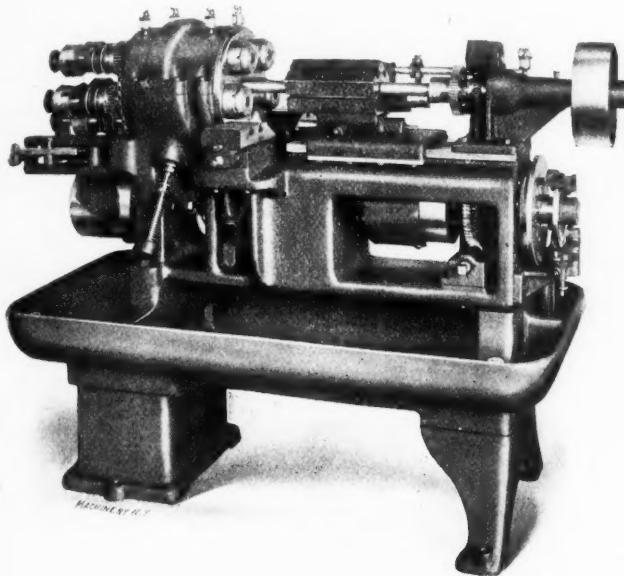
The Peerless Automatic Multiple-spindle Screw Machine.
